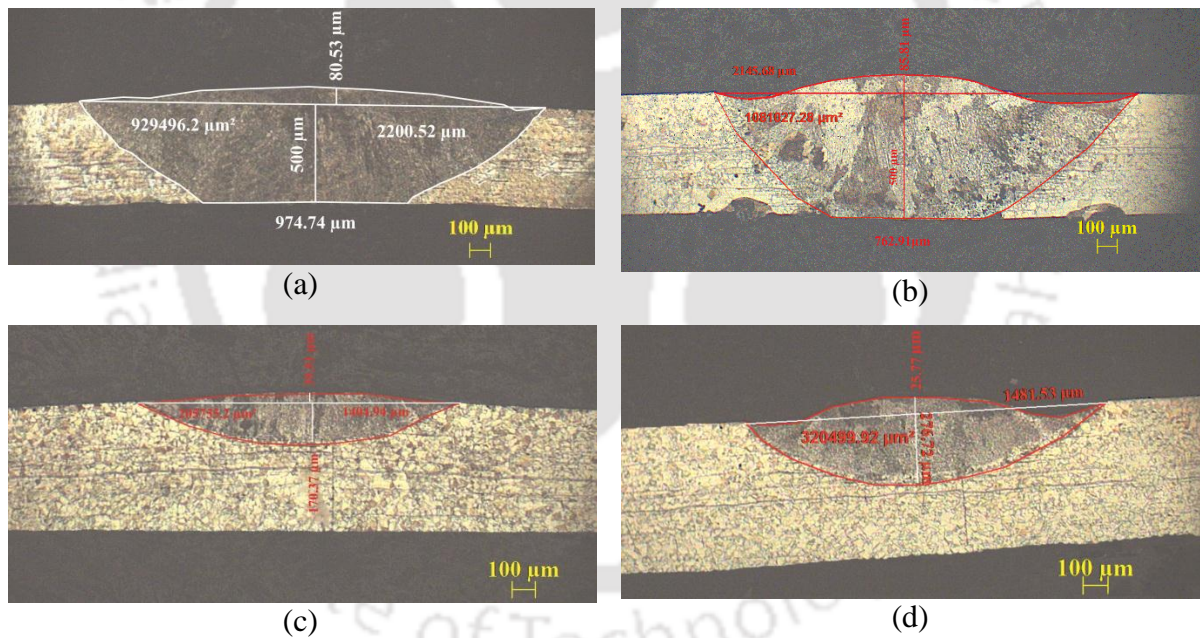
Sections of weld bead geometry under different welding conditions and without heat
